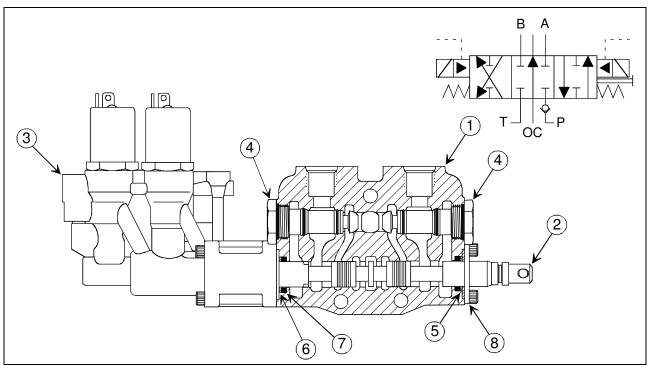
Model V20 Externally Piloted Solenoid Work Sections (Parallel 4-Way Section Shown)
